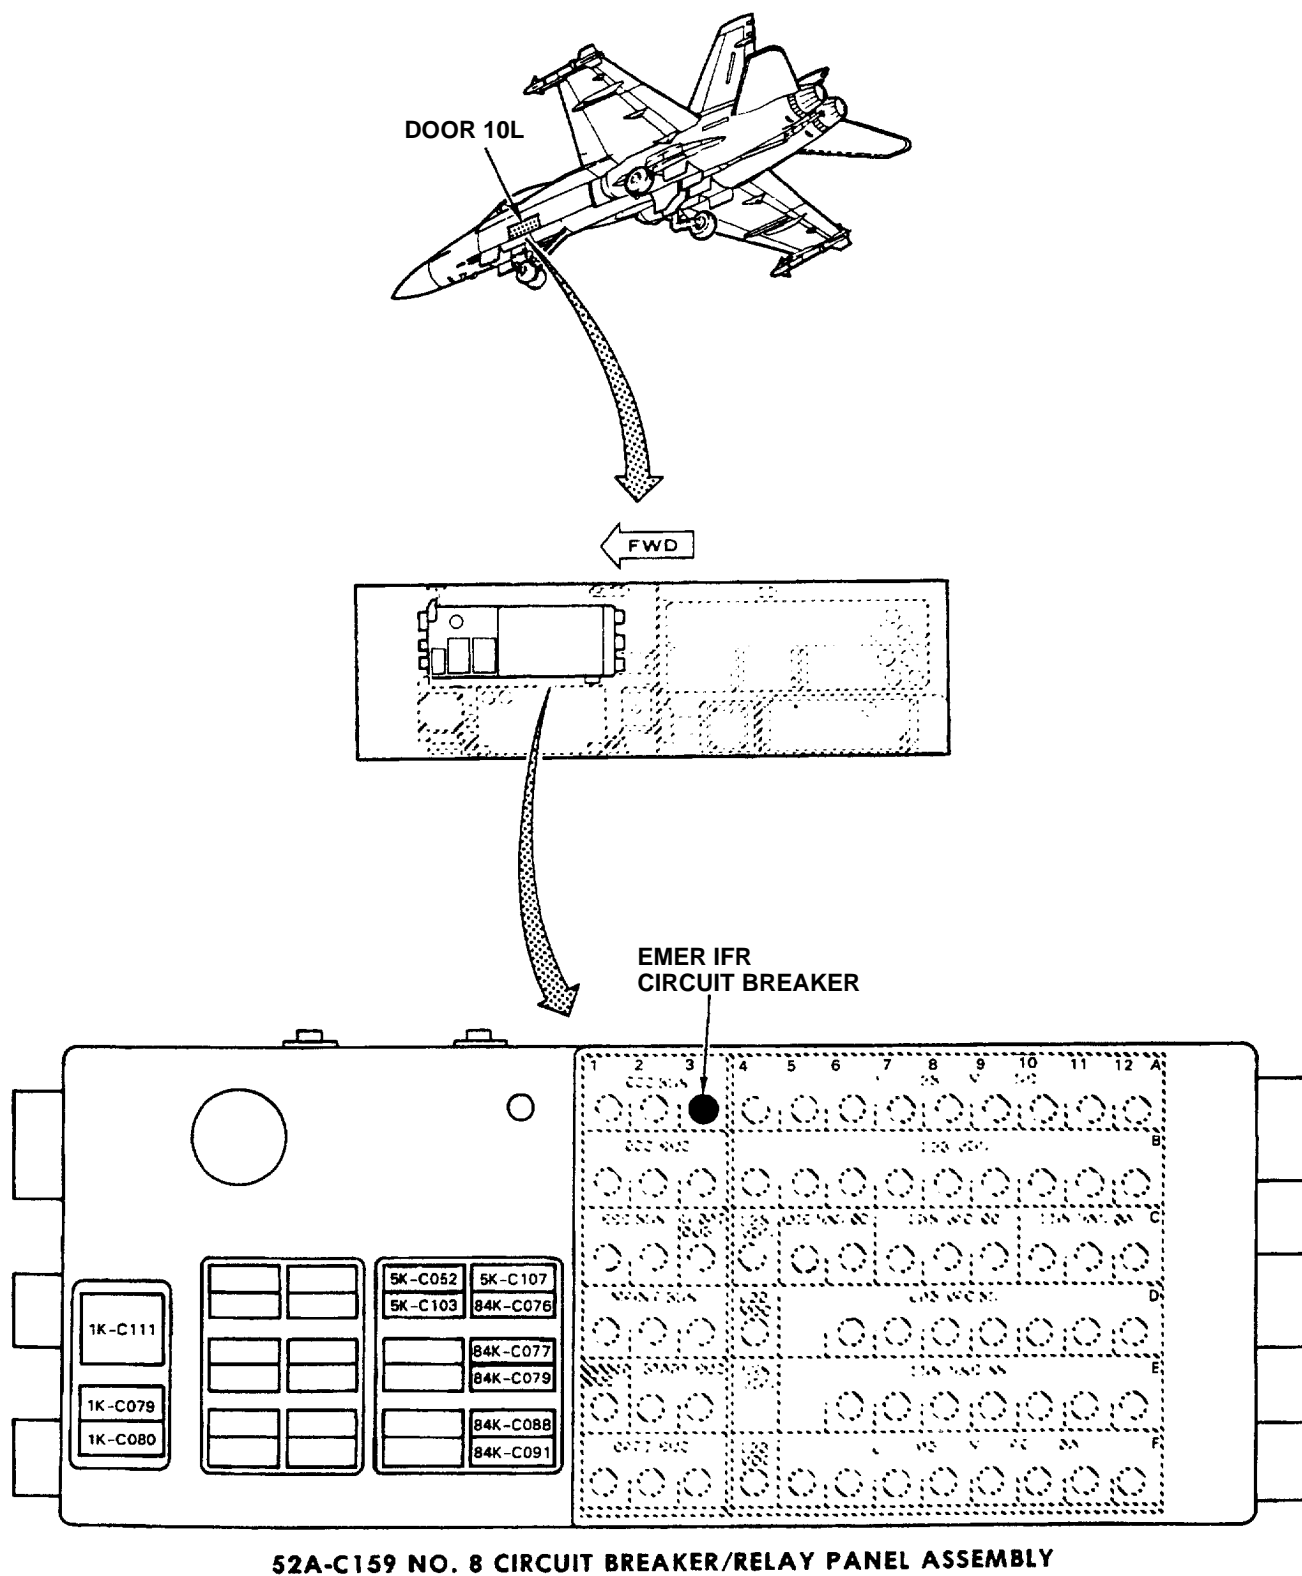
Inflight Refueling Probe Assembly (5MPB547) (Sheet 2)
